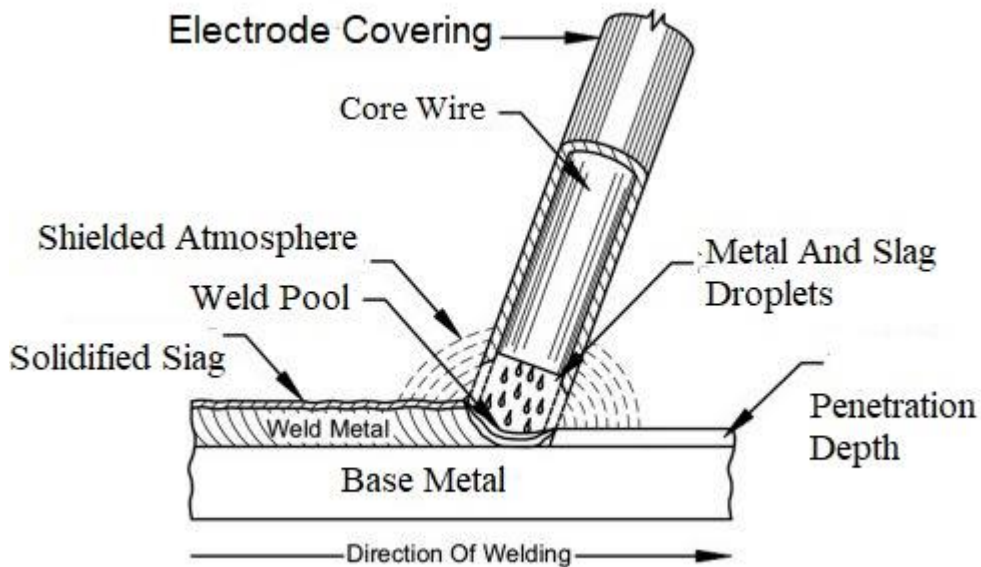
Welding of shielded metal arc process (SMAW) [34].
